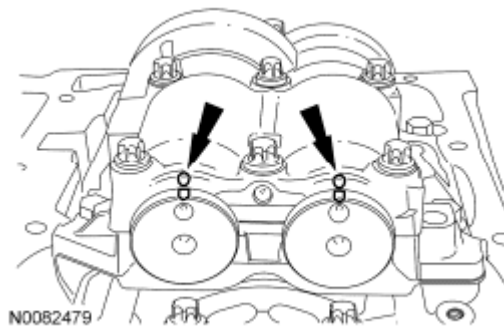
Locating Balancer Unit And Shafts Reference Mark
